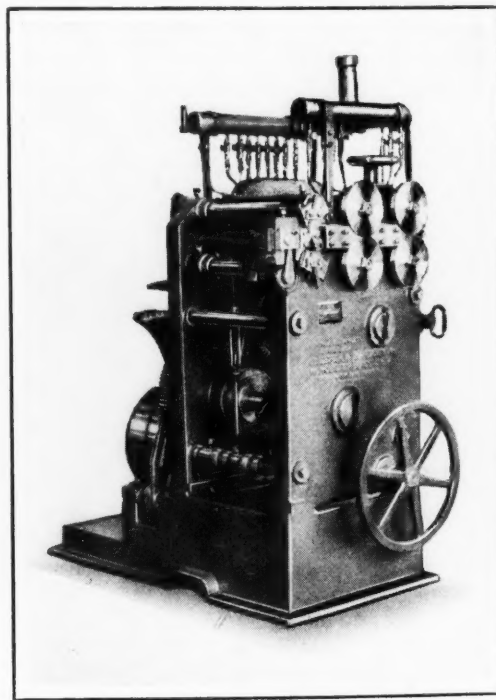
Eastern Machine Screw Corporation's Two-spindle Threading Machine
